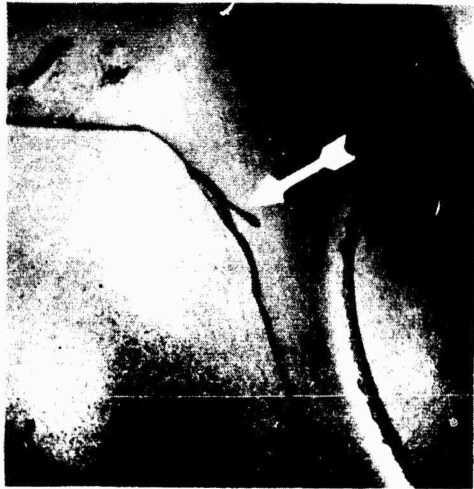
Arrow Denotes 1-Inch Crack In Left Rear Suspension-Arm Assembly In the Spring Seat On M718 after 8307 Test Miles.
